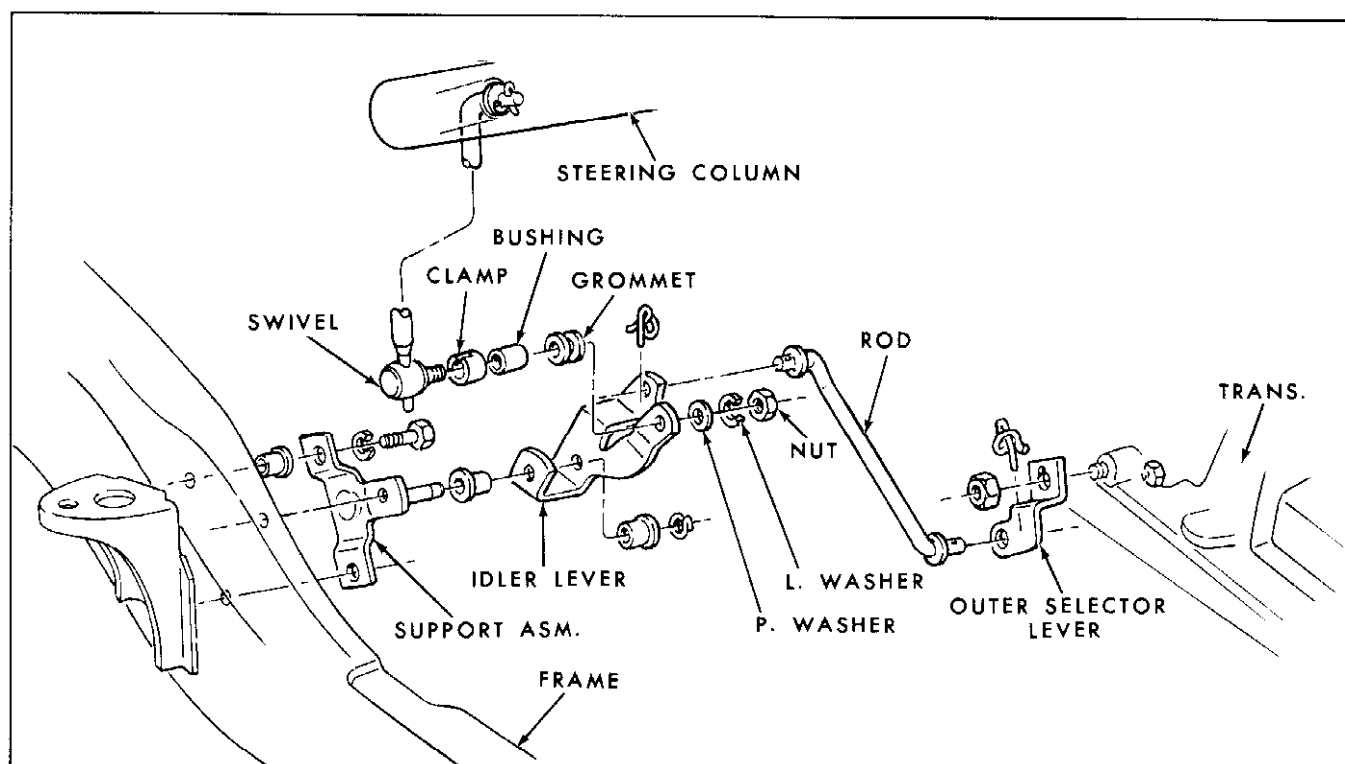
E-1 Lower Gearshift Controls - Column Shift
